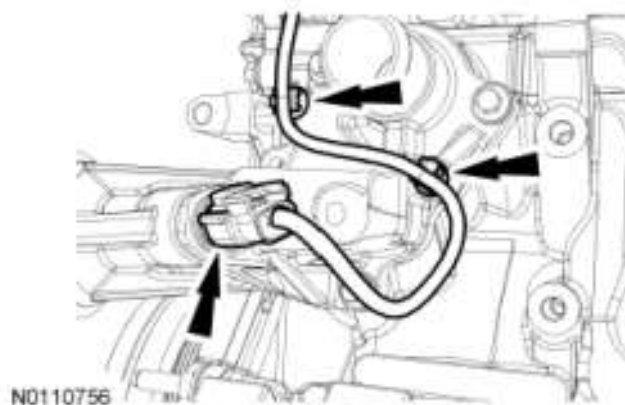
Locating Engine Oil Pressure (EOP) Switch Electrical Connector
